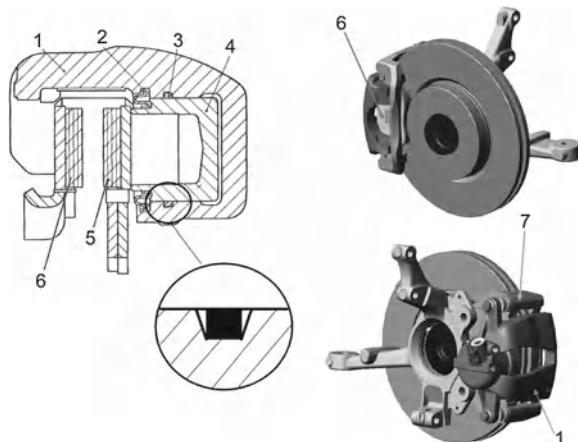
Floating caliper disc with a single hydraulic cylinder. An enlarged cross section of the cylinder is shown with the detail of the sealing ring (from Genta and Morello 2009)
